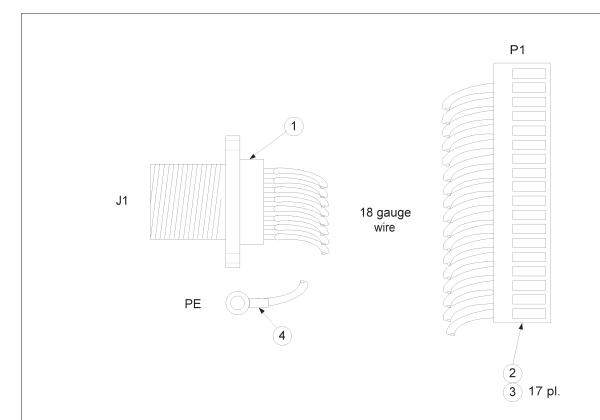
PENDANT CONNECTOR HARNESS EXPLODED VIEW
